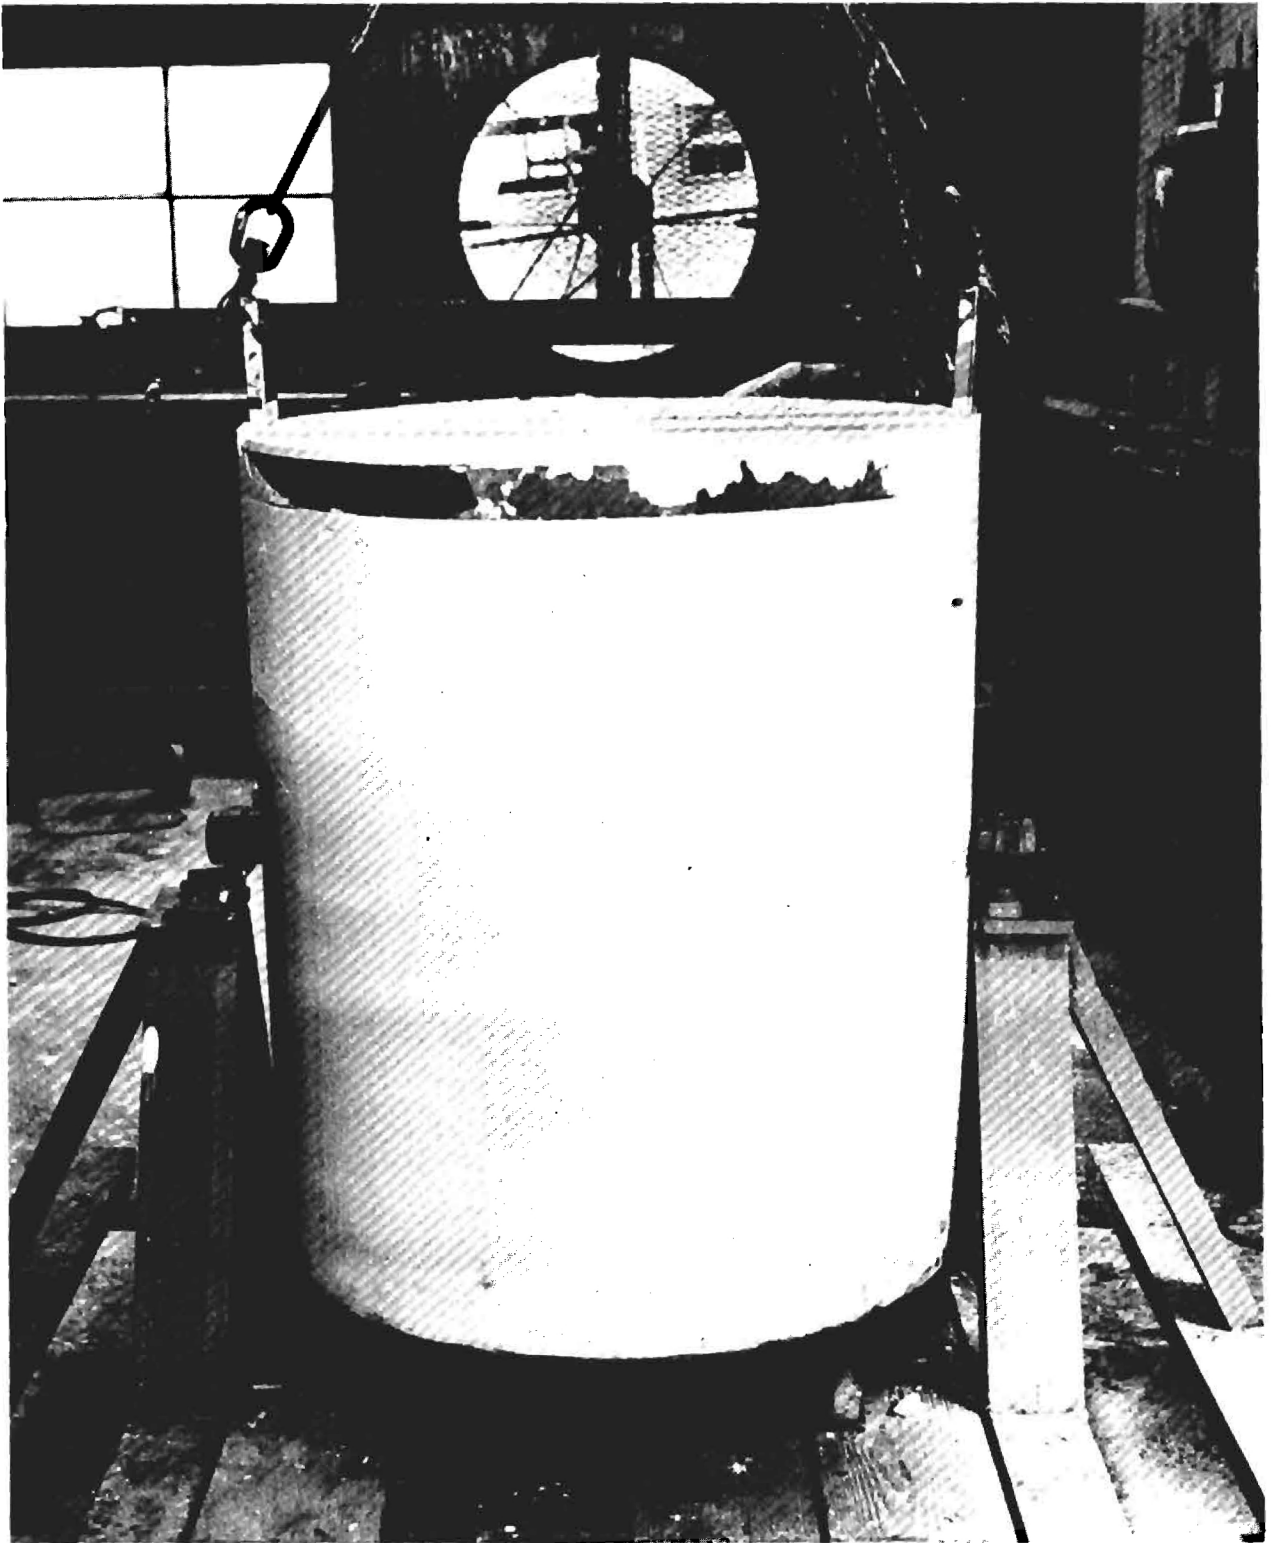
Plaster Nose Cone Mold After Removal of Sheet Metal Band.
